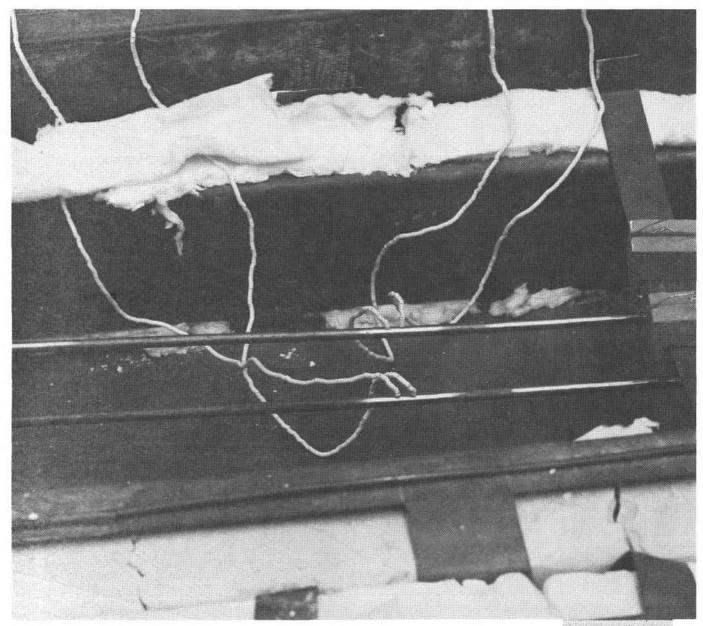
A Closeup View Showing Percussion-Welded Thermocouple Wires to a Heater Sheath
